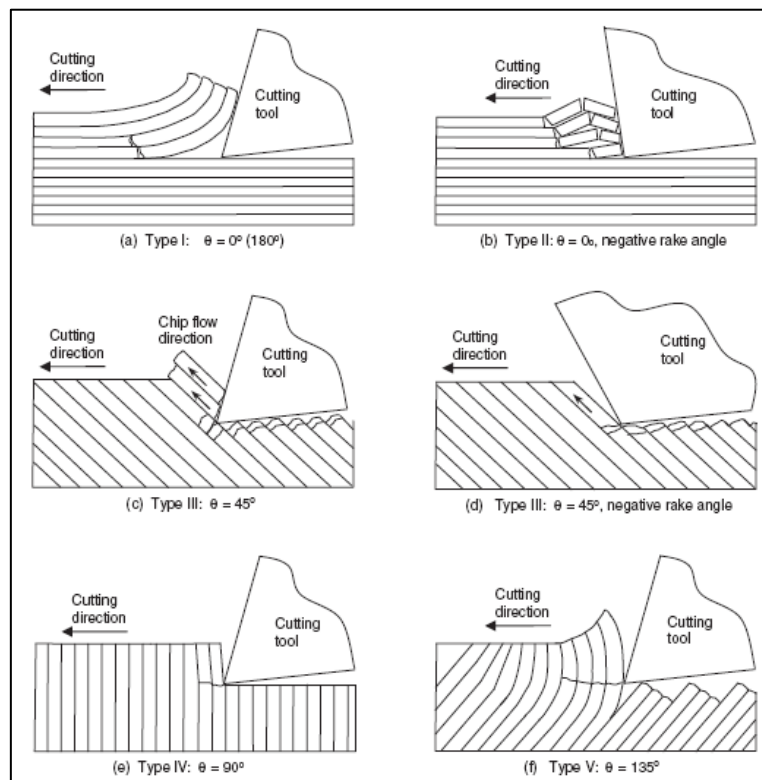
Cutting mechanism in orthogonal machining of UD FRPs (adapted from [22], [75])
